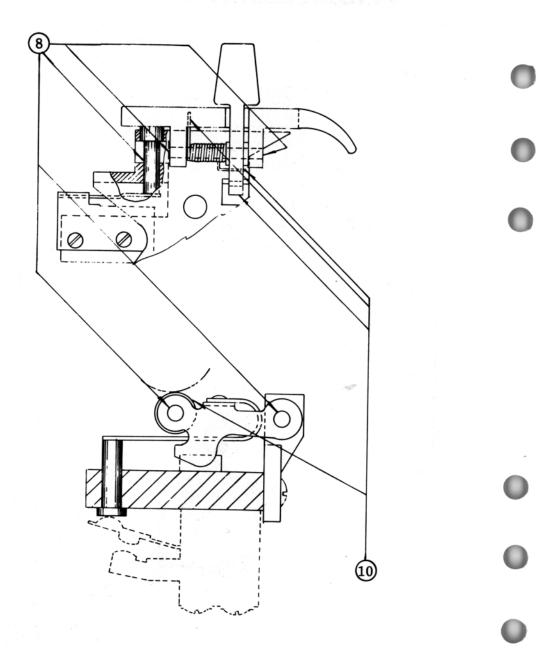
Reader - Tape Gate, Circuit Breaker Arm Assembly
